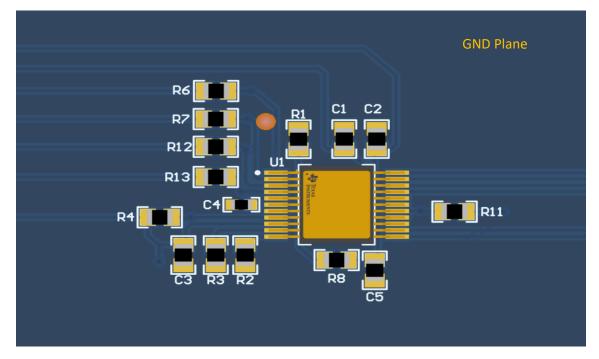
Printed Circuit Board Layout Example: Top Layer 3D View
